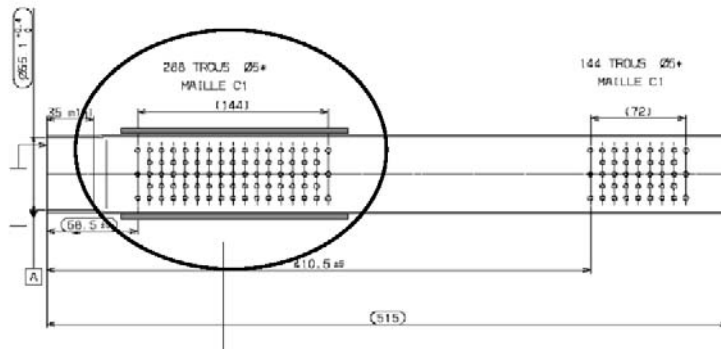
Outlet pipe. A stainless steel sleeve is located above the left perforated section with 288 holes. The other two pipe perforates contain 144 holes each.
